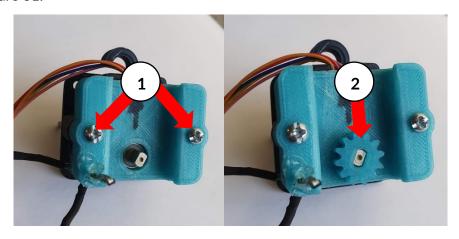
Bolted to Base (1) and Engaged Gear (2)
